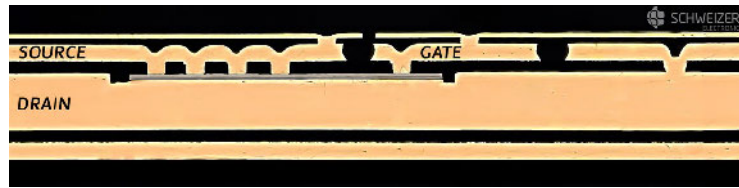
A cross section of a PCB technology called smart p<sup>2</sup> Pack<sup>®</sup> (Schweizer). The die is connected by silver sintering on the drain (Leadframe) inside a cavity. The top connections are done using microvias [10].
